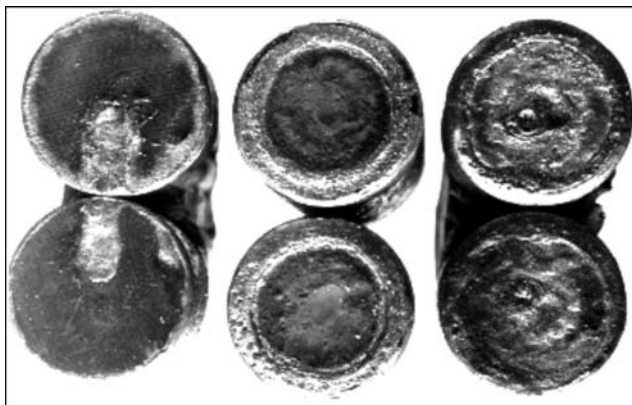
Appearance of the rod end faces with traces of the active spots of the arc column in different welding modes
